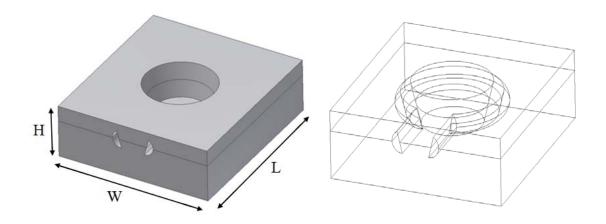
CAD and Wire-frame Models for Profiled Conformal Cooling Channel Mould Cavity
